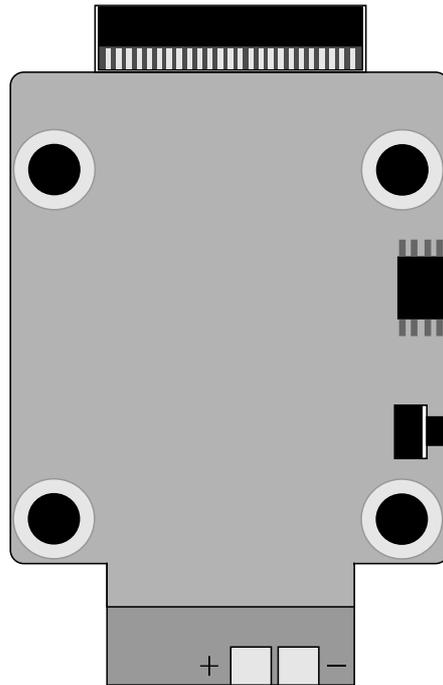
schematic diagram of bottom power soldering pad port
